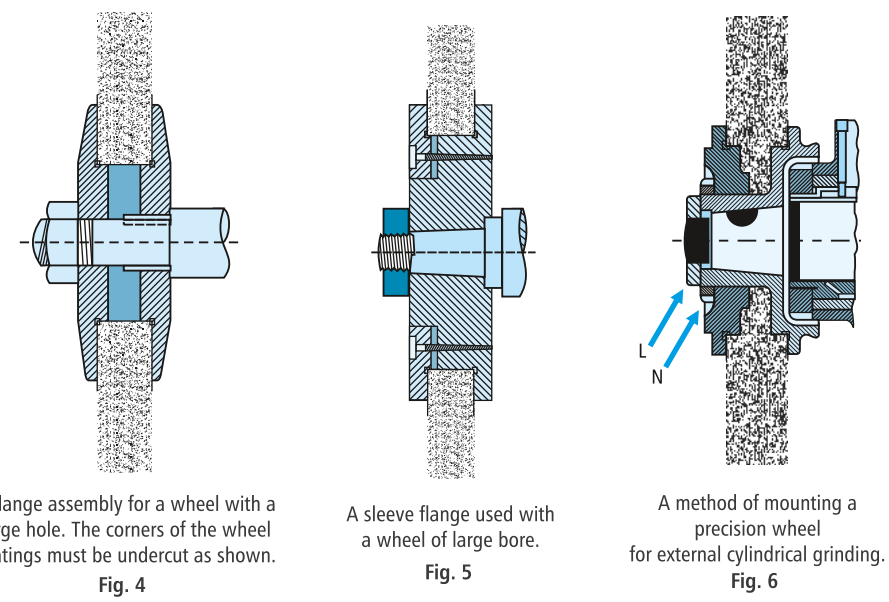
A flange assembly for a wheel with a large hole. The corners of the wheel seatings must be undercut as shown.
